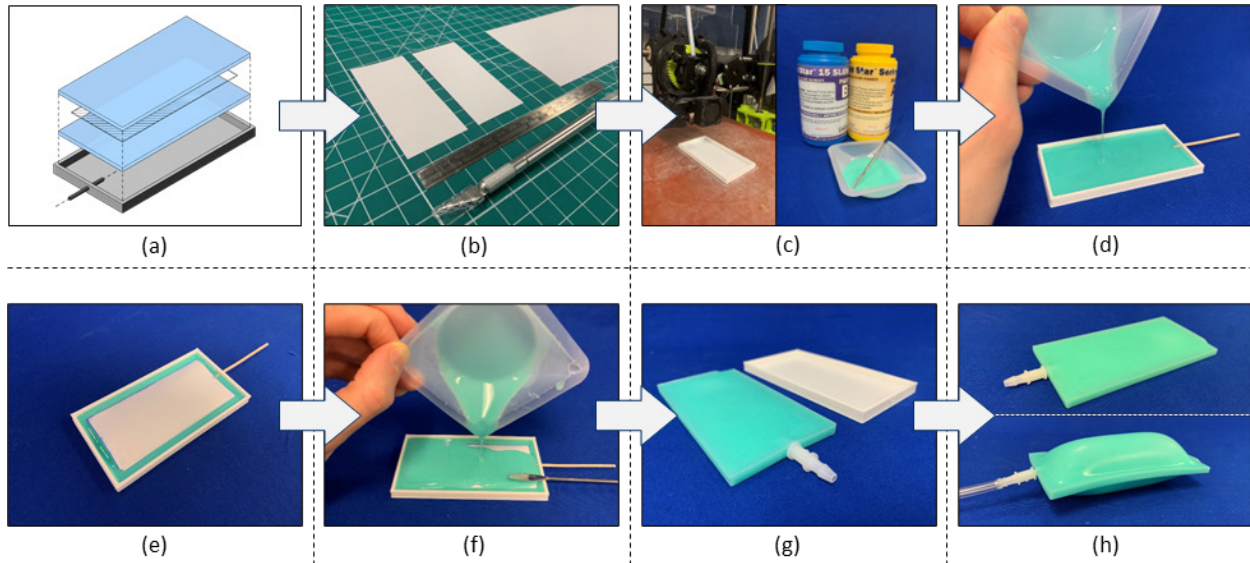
An example fabrication process of a proto-cell using the multi-step molding technique. (a) The bottom and top skin layers and their mold are designed in software (e.g., Rhinoceros), including the details of the masking layer pattern. (b) Two identical masking layers are cut into shape using a Cricut Maker desktop plotter cutter using a copier paper. (c) The mold is 3D printed using an FDM 3D printing machine using PLA and pre-polymer silicone (e.g., Mold Star™ 15 SLOW, Smooth-On Inc., USA) mixture is prepared. (d) The pre-polymer silicone mixture is poured into the mold to form a silicone sheet of 2.5 mm, which is left in the mold for overmolding the top skin layer in later stages. (e) Two overlapping masking layers are placed on the partially cured bottom skin with a thin mandrel placed in-between extending outside of the mold structure. (f) Another batch of pre-polymer silicone mixture is poured into the mold, encapsulating the masking layers and mandrel, and chemically forming a bond around the unmasked perimeter once the curing is complete. (g) The thin mandrel is removed from the system, and a barbed pneumatic fitting is horizontally attached between the skin layers, (h) producing a pneumatically operable proto-cell.
